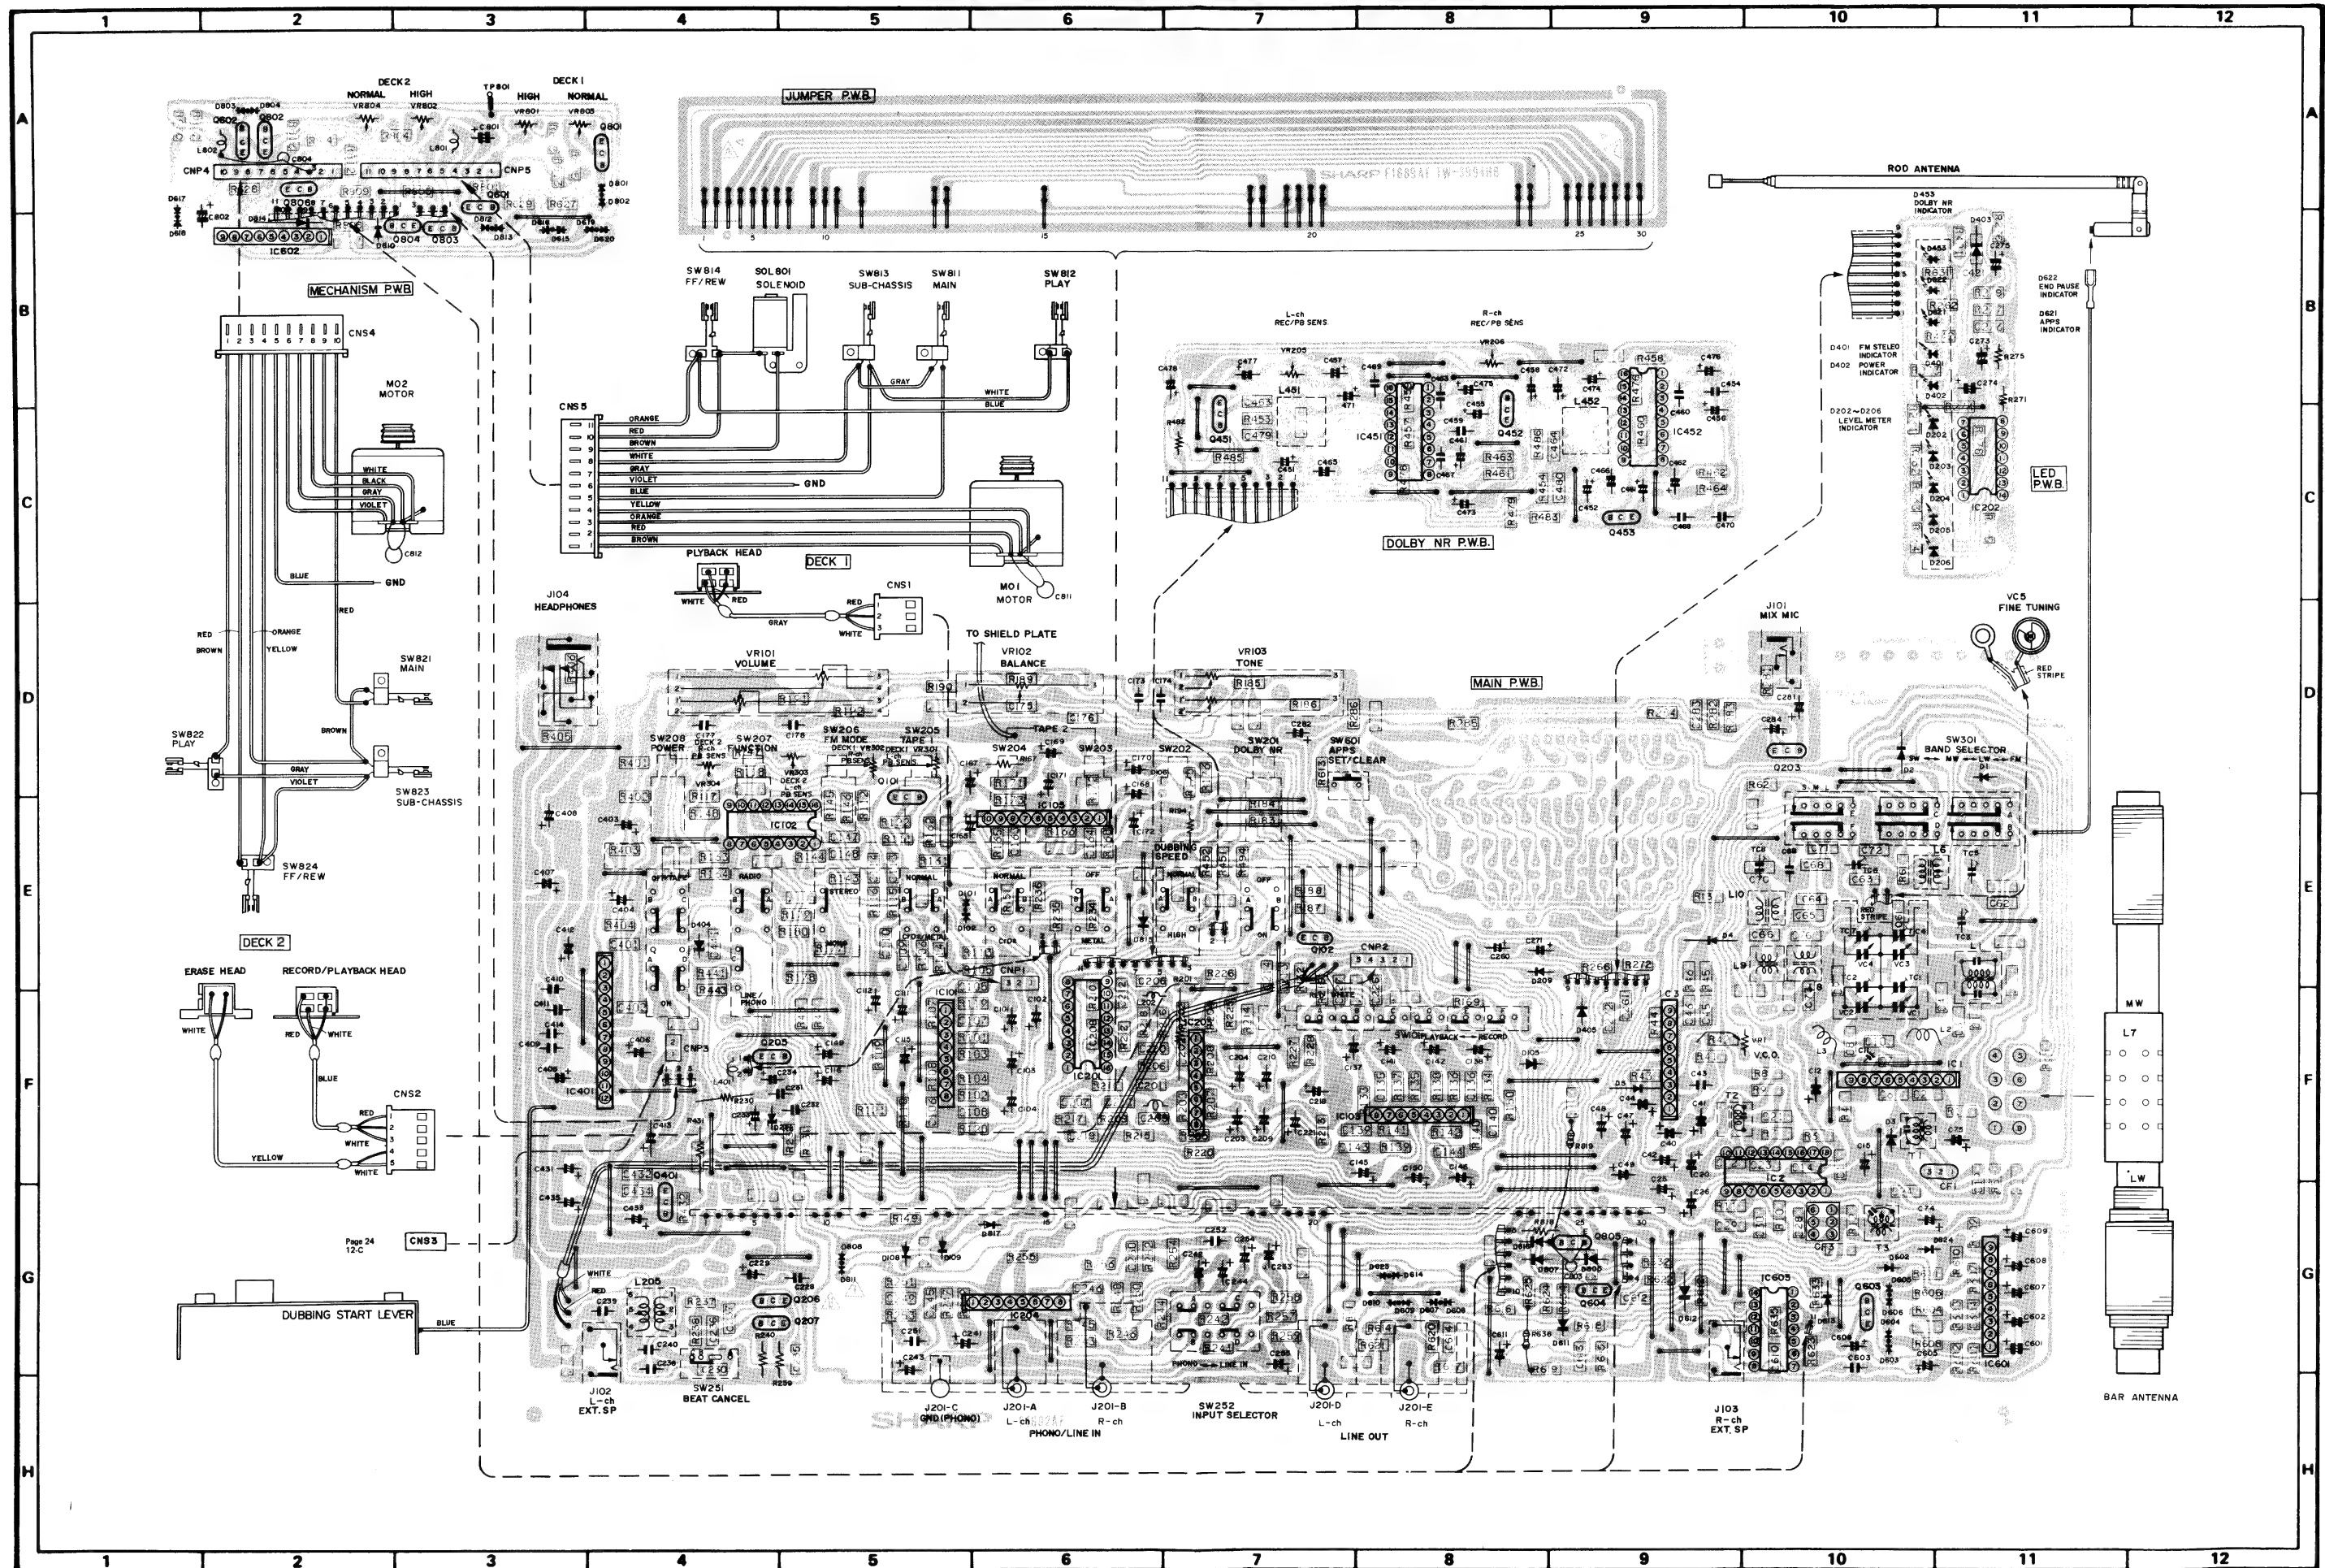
WIRING SIDE OF P.W. BOARD (1/2)
